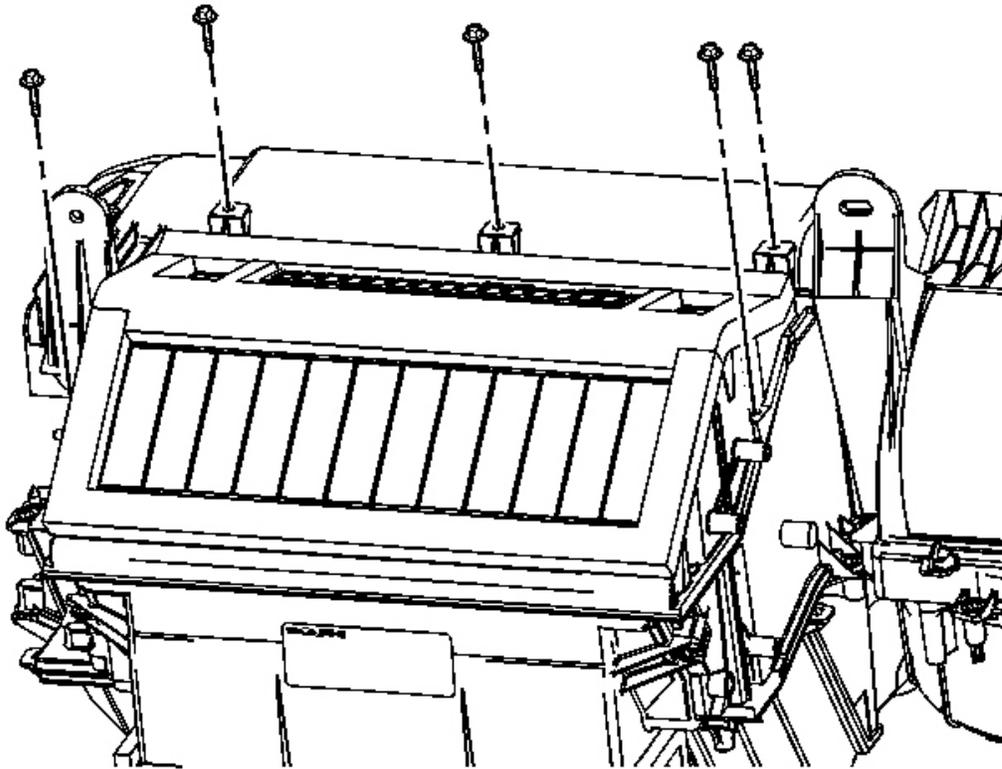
Identifying Mode Valve Assembly Retaining Screws
